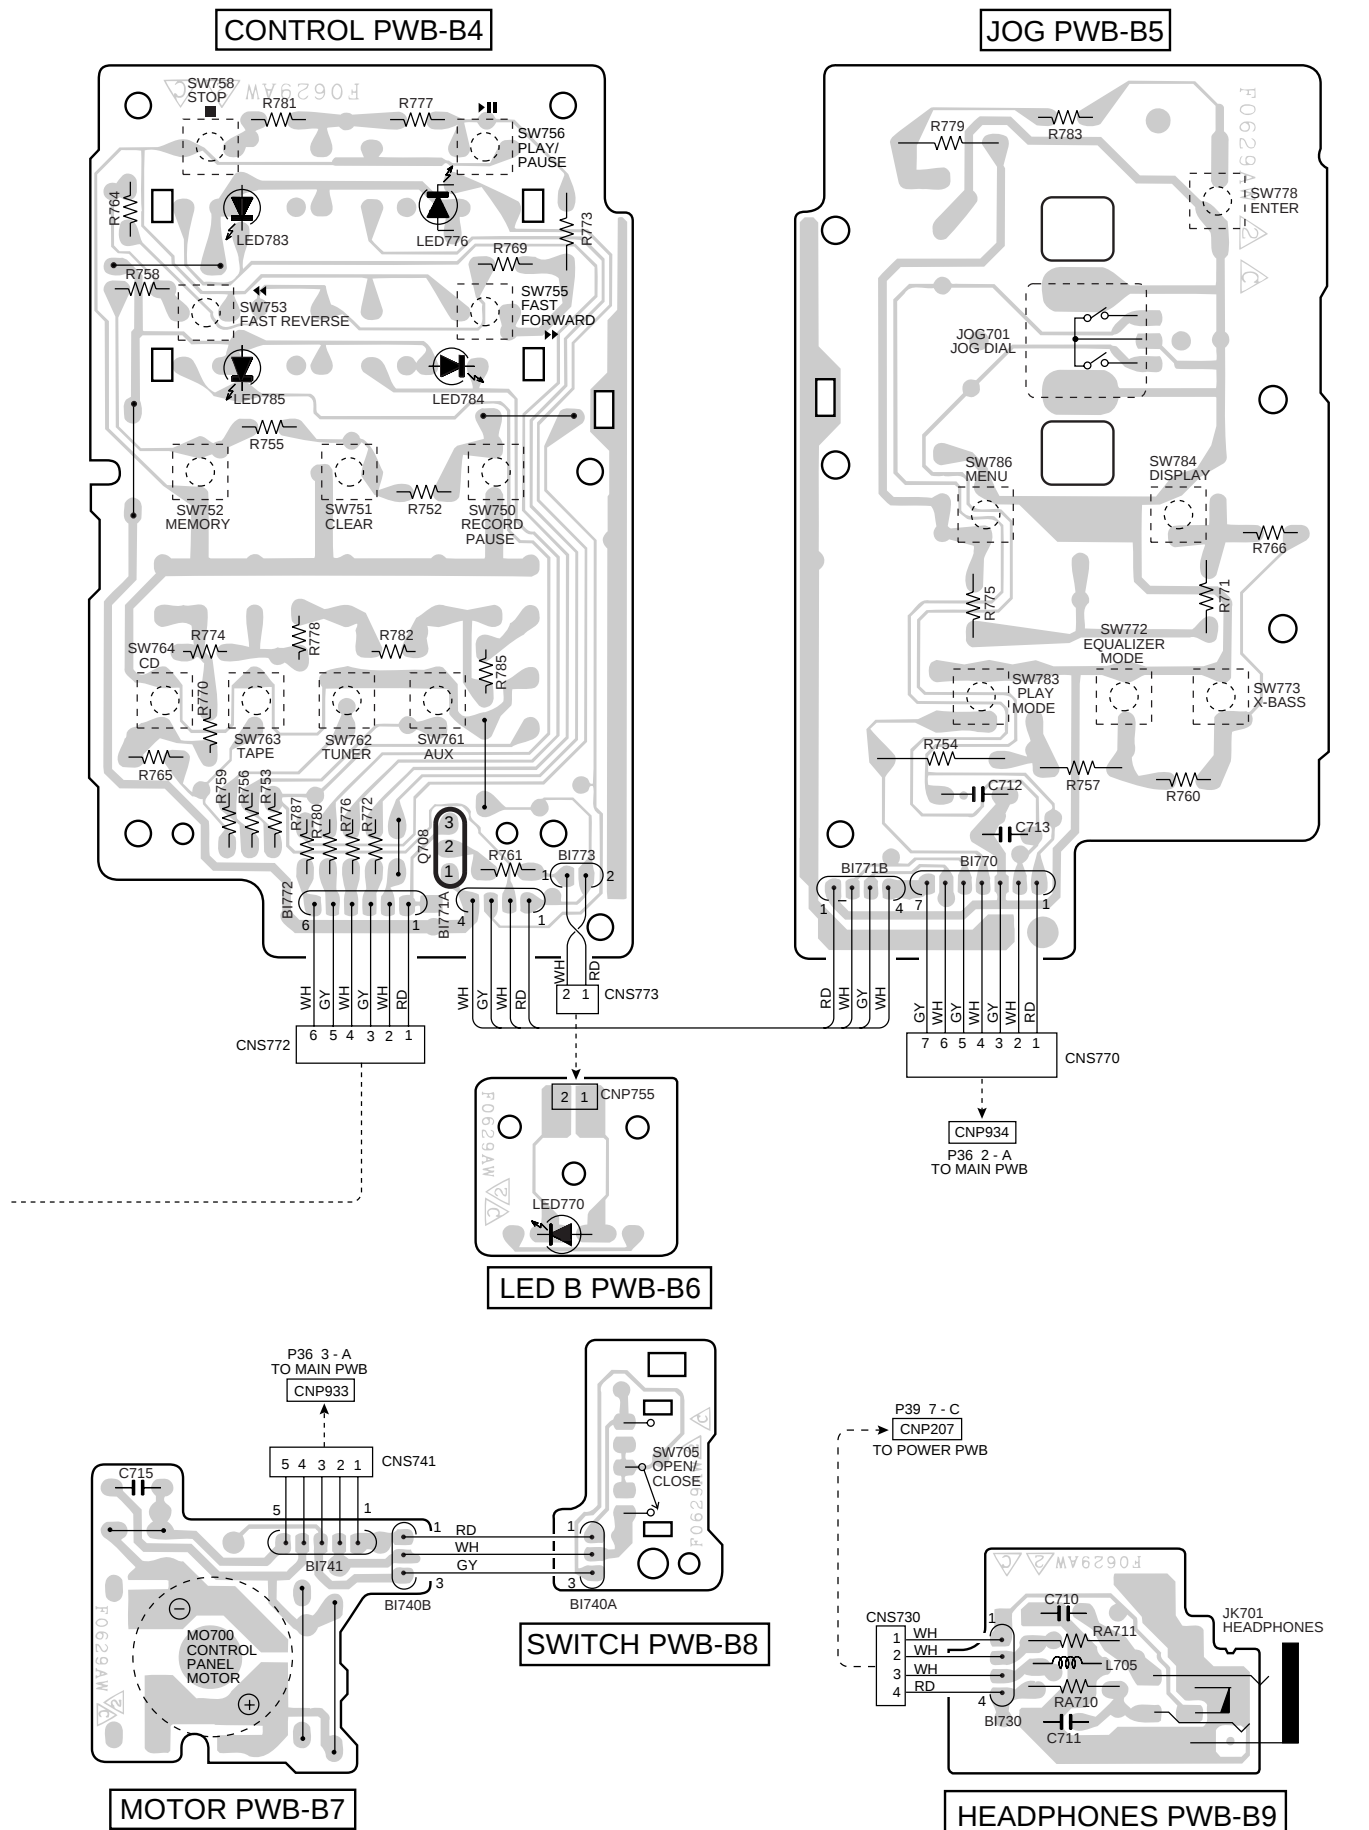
WIRING SIDE OF P.W.BOARD (8/10)
